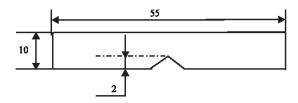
Configuration of specimen used for impact load testing (dimensions in mm)
